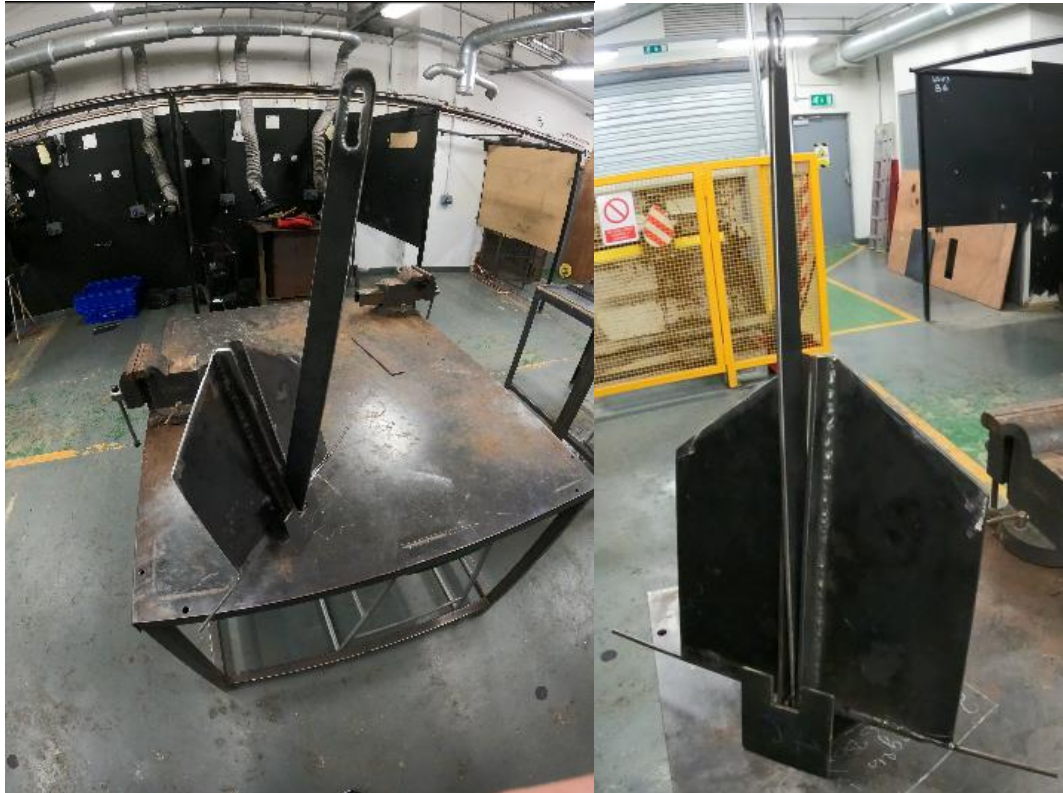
and 20 – showing the welding of the fluke support to the fluke. The welding application has been unevenly applied and required rectification.
